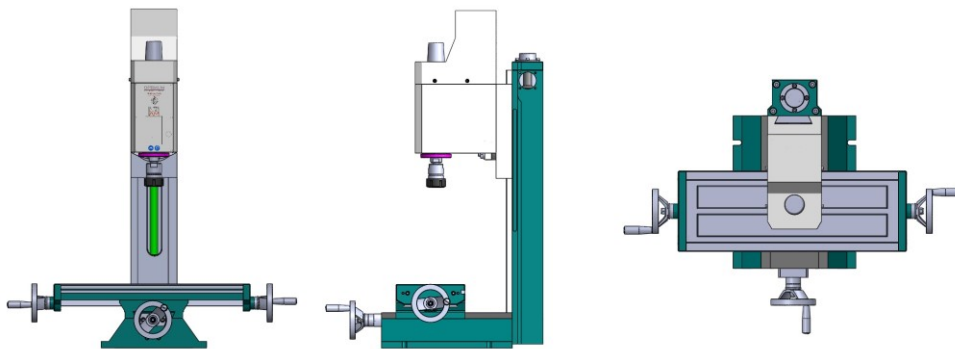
Front, side and top view of the 3D CAD model of the BF20 Vario machine
